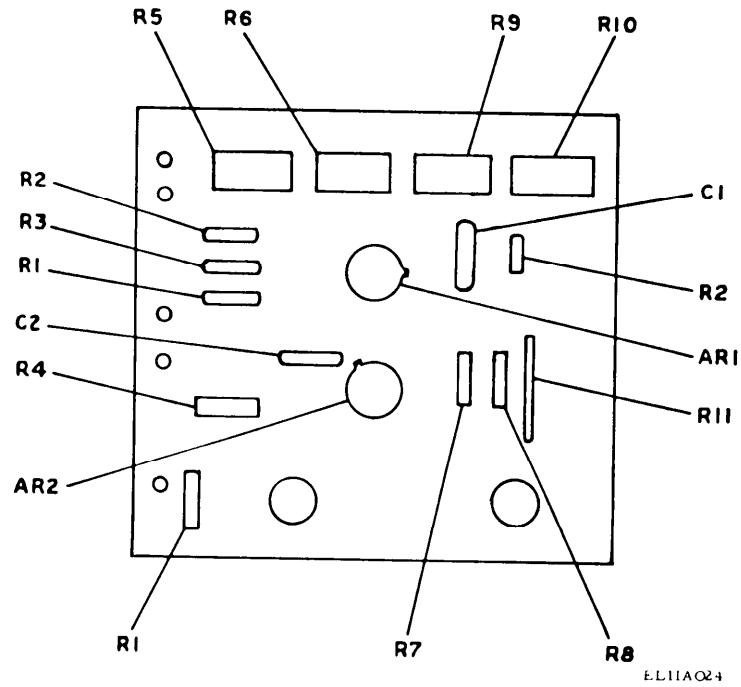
Meter board AS, parts location diagram. (AN/USM-265A only)
